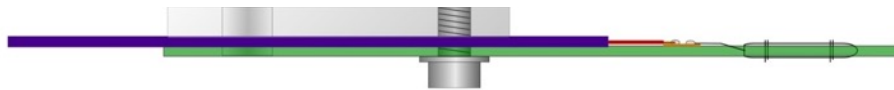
Details of the cable restraining system at the sensor are shown. By sandwiching the cable between the PCB and stainless steel rod mount, the sensor soldering joints are tension free during construction and installation.
